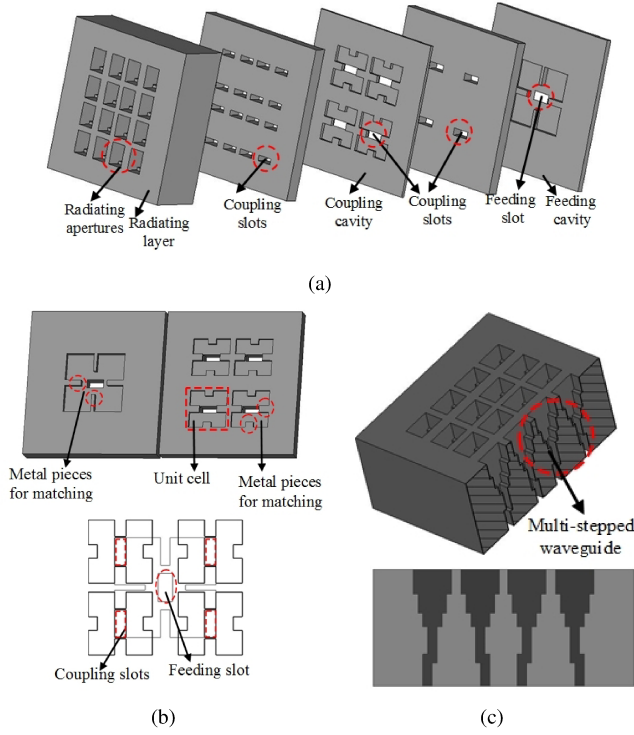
Schematic of the (a) Exploded view (b) Feeding layers. (c) radiating layer
